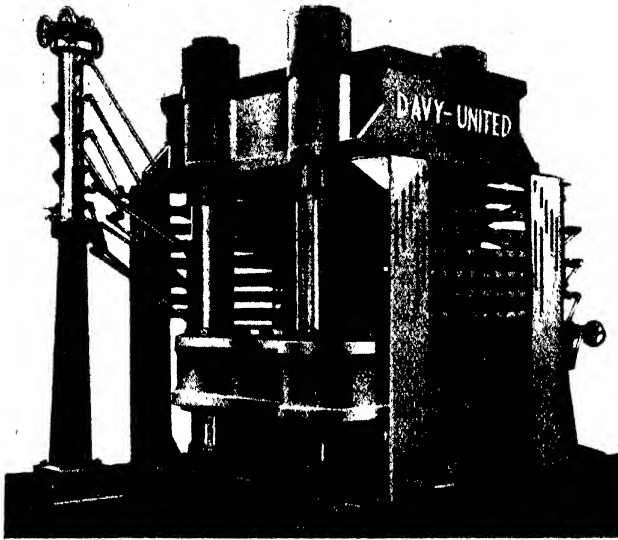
UPSTROKE HYDRAULIC PRESS FOR THE MANUFACTURE OF LAMINATED SHEETS
